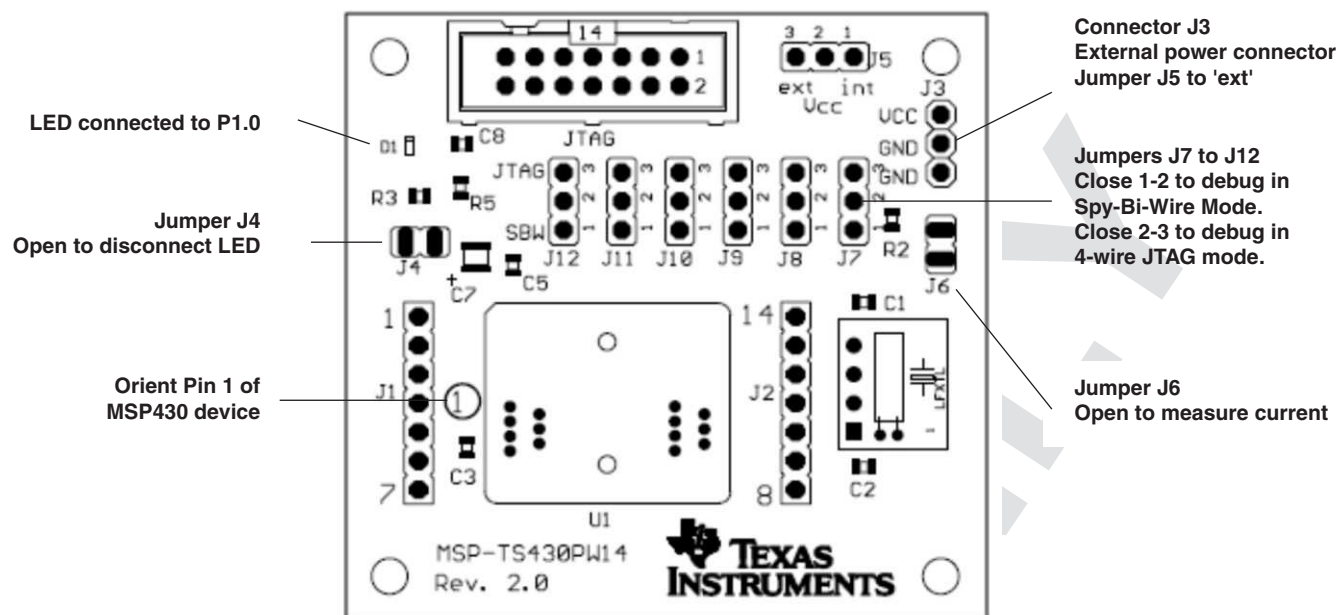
MSP-TS430PW14 Target Socket Module, PCB
